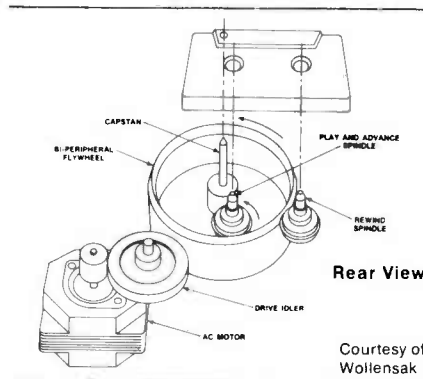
This simplified drawing of the patented Wollensak bi-peripheral drive mechanism shows the AC motor, rim-driven flywheel, and the positioning of the spindles relative to the flywheel.
